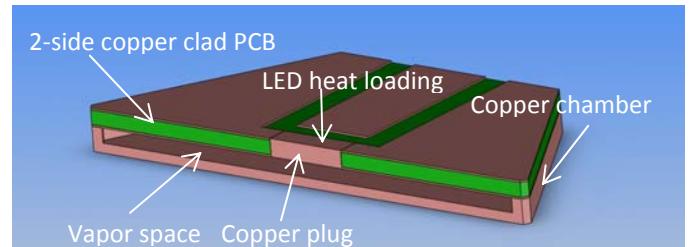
Cross-sectional view of the prototype design of the PCB planar thermosyphon for single LED. A copper plug is implemented in the middle of a two-side copper clad FR-4 PCB via a through hole to simulate the LED thermal pad and the FR-4 PCB is bonded to a copper chamber to form the vapor space which contains the dielectric working fluid.
